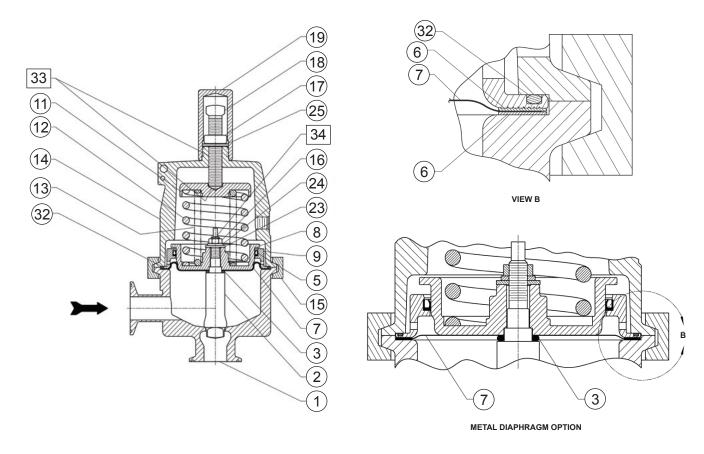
Type SR8 Backpressure Sanitary Regulator Assembly Drawing 1/2 through 1-1/2-Inch Sizes (DN 15 through 40)
